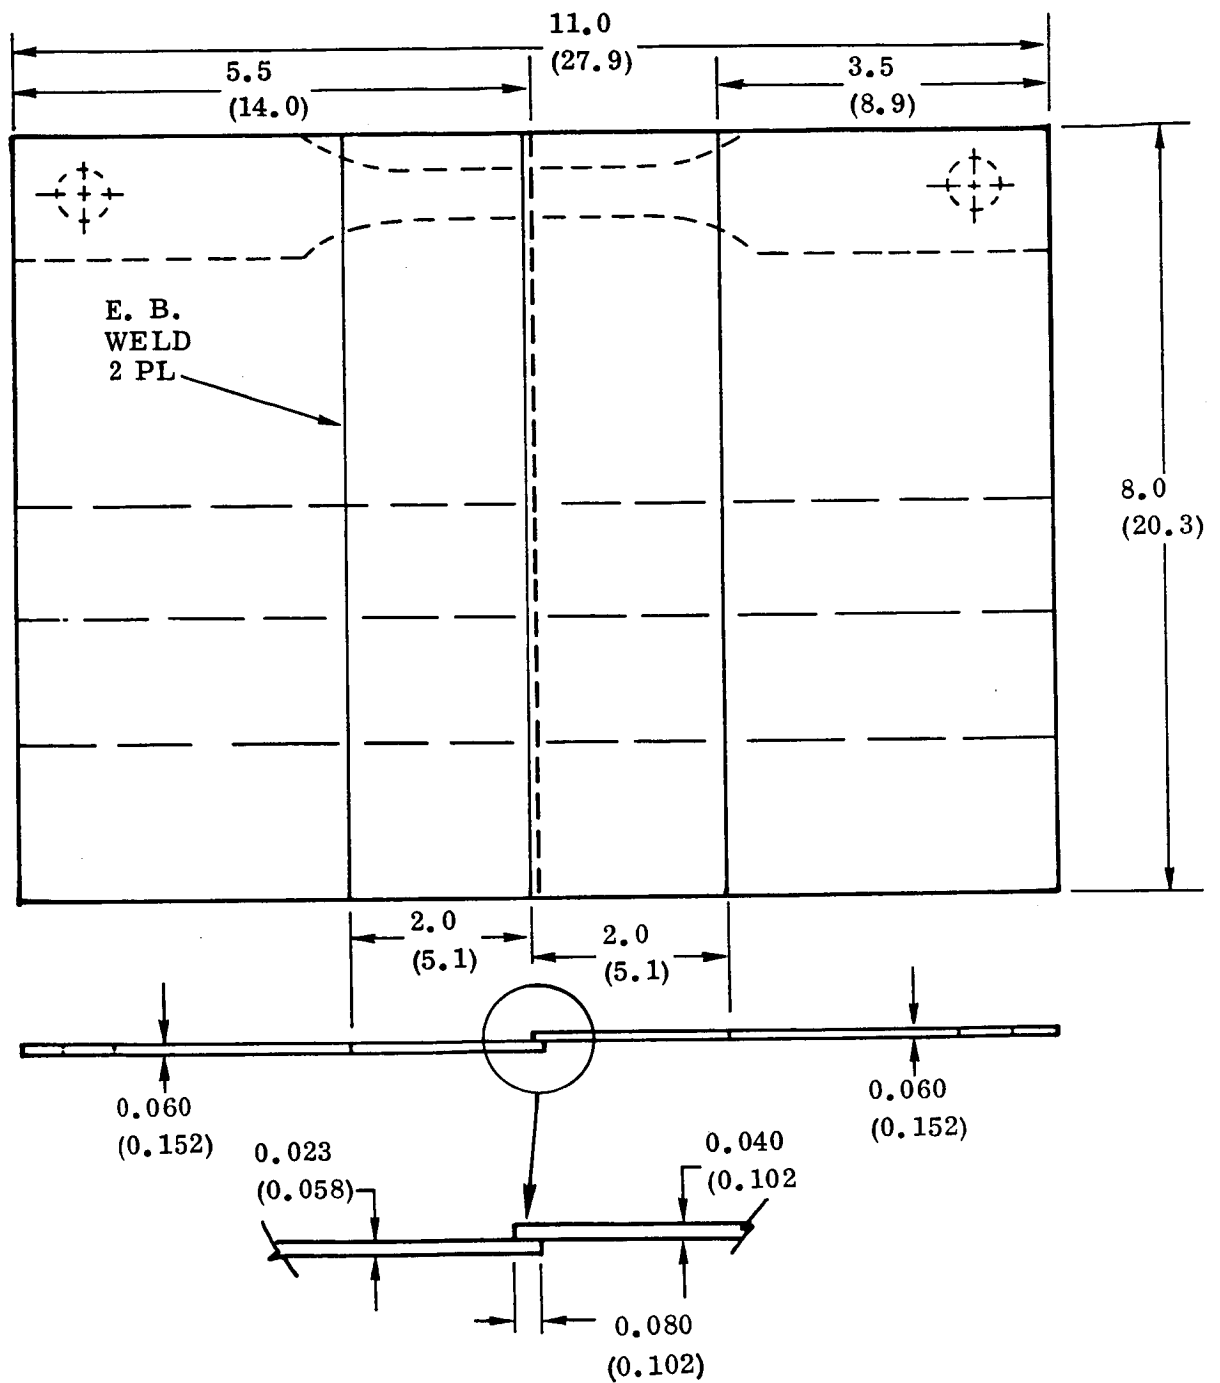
Cb-752/Ti-33 Cr Braze System Test Specimen
